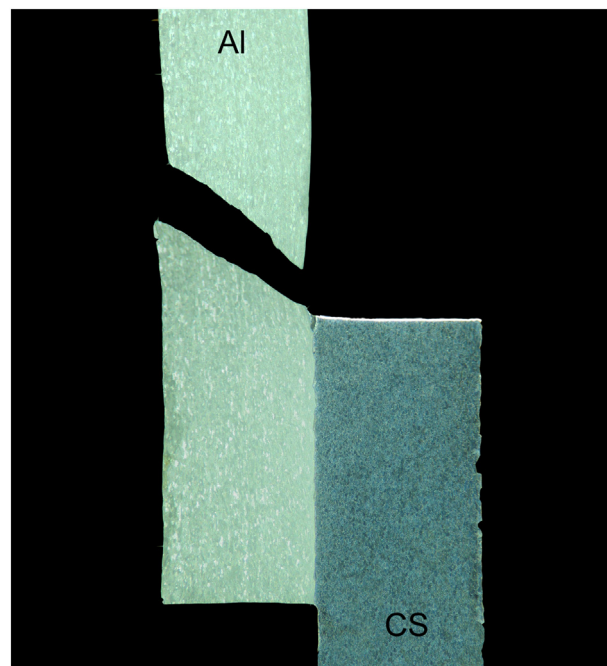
Characteristic of the ductile fracture outside the welding region of A.CS-L weld.
